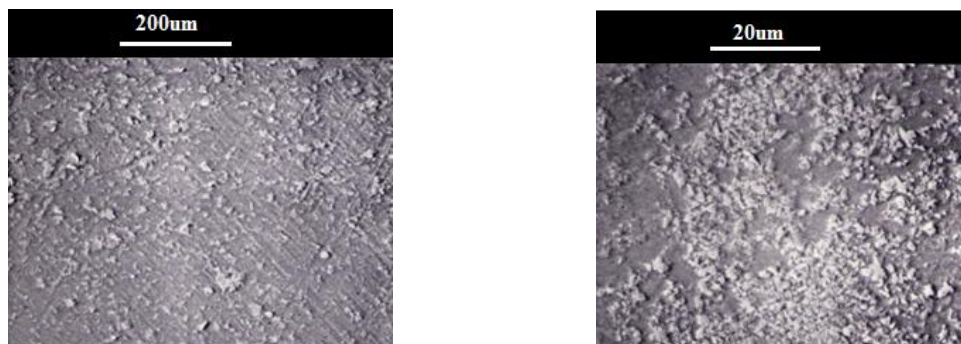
Fracture surfaces of alumina-silver assemblies after pusch-test
